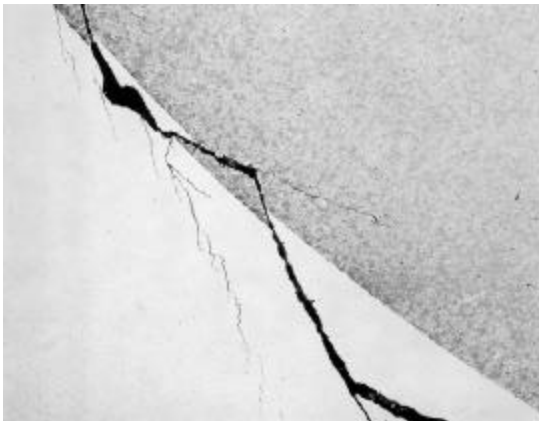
Closer view again of the cracking within lever 46, showing cracks developing within both the pin and arm materials. Magnification X 92
